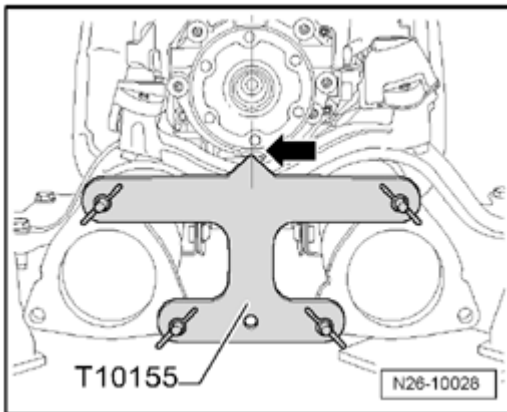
Bolting Template T10155 Onto Exhaust Pipes
